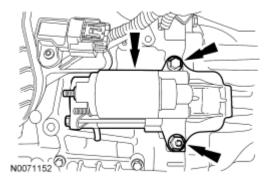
Locating Stud Bolt, Starter And Bolt Courtesy of FORD MOTOR CO.
